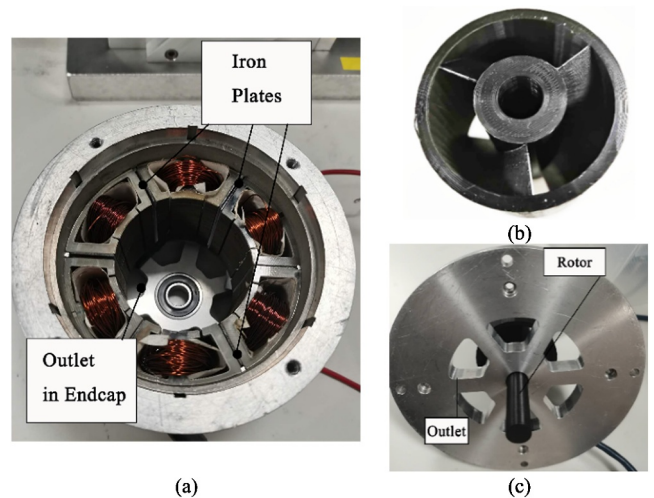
| 12-slot SPM prototype machine with self-cooling capability inner view. (a) Modular stator with housing, (b) 3D-printed 3-blade rotor without shaft and (c) outlet side endcap.
